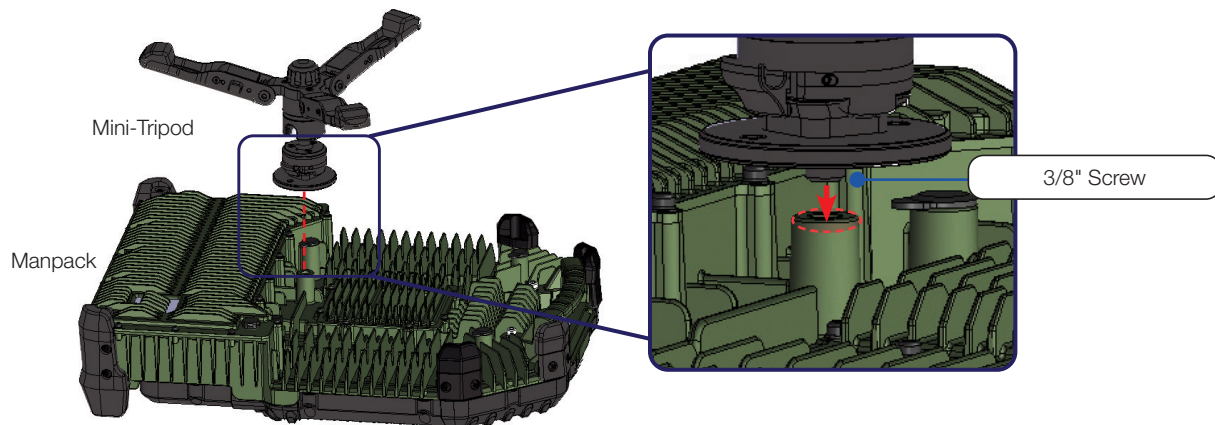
Inserting the 3/8" Screw of the Mini-Tripod
